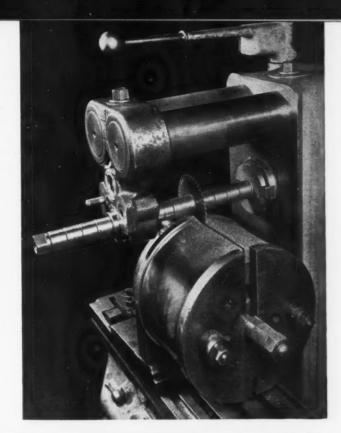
(Top) Bearings are cut in half in horizontal milling machines after boring and grinding the outside diameter.
